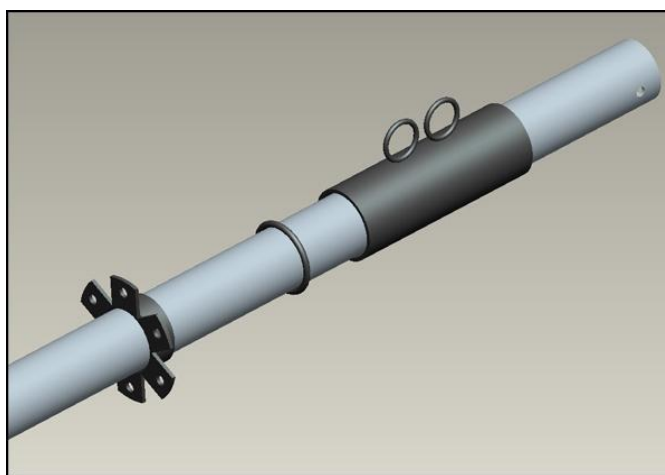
CAD-model of axis, wire holder, stop ring and bearing.
